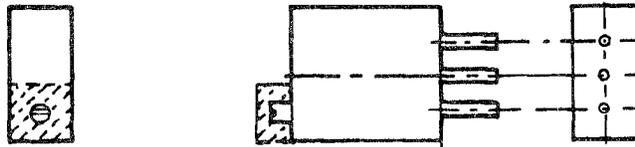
Outline drawing of a style RJR12 nonwirewound variable resistor.
